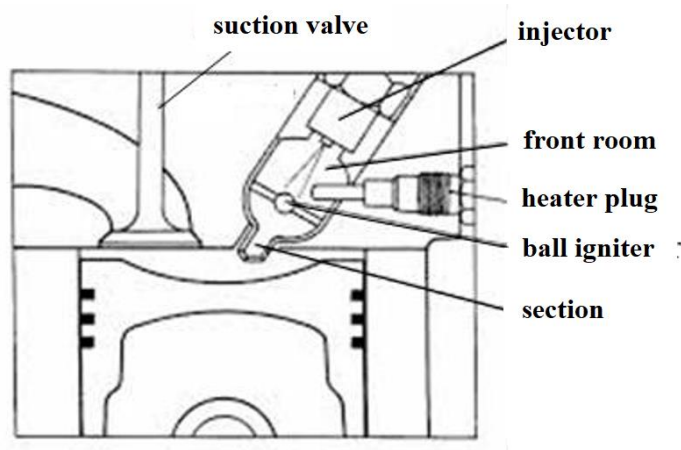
Perkin P135-4 diesel engine combustion chamber.
